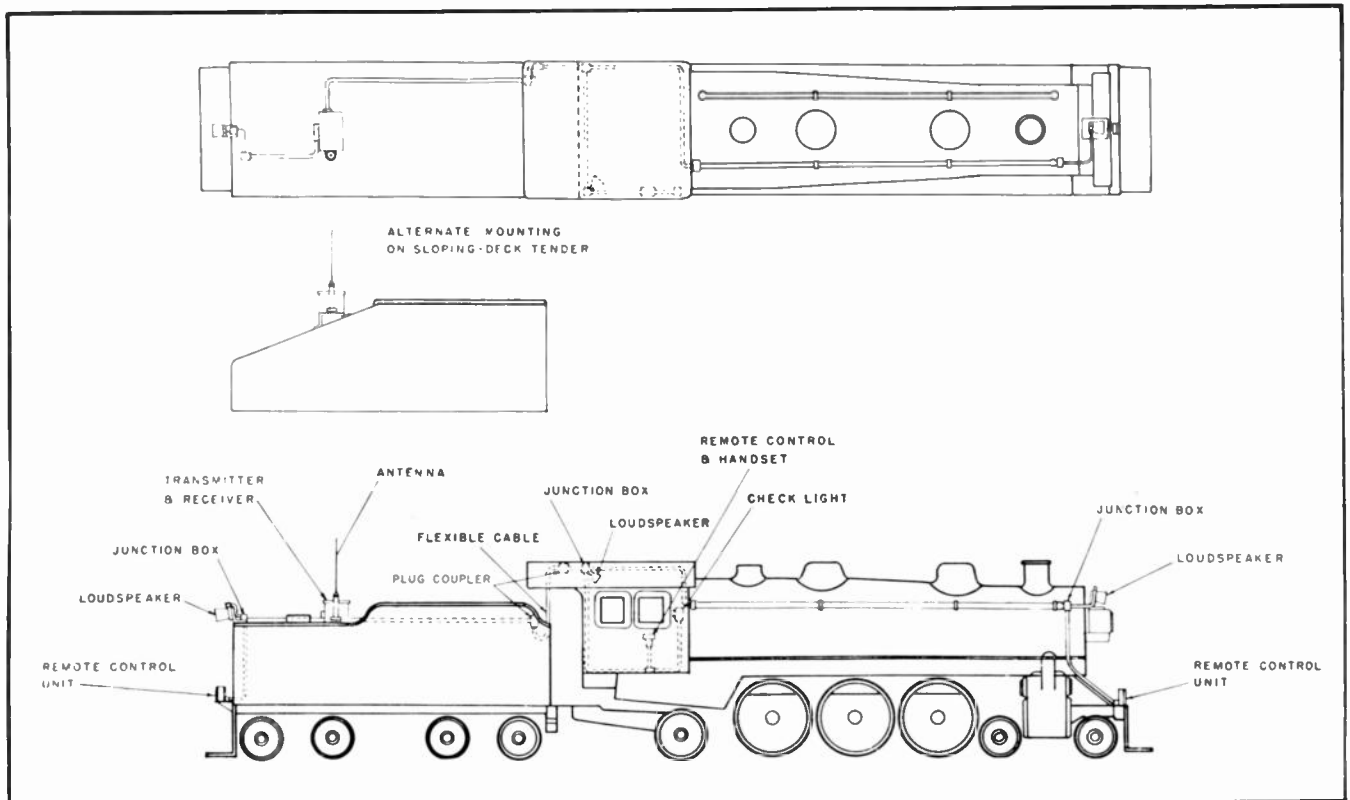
METHOD OF INSTALLING FM EQUIPMENT, CHECK-LIGHT, AND OPERATING CONTROLS ON A STEAM LOCOMOTIVE
